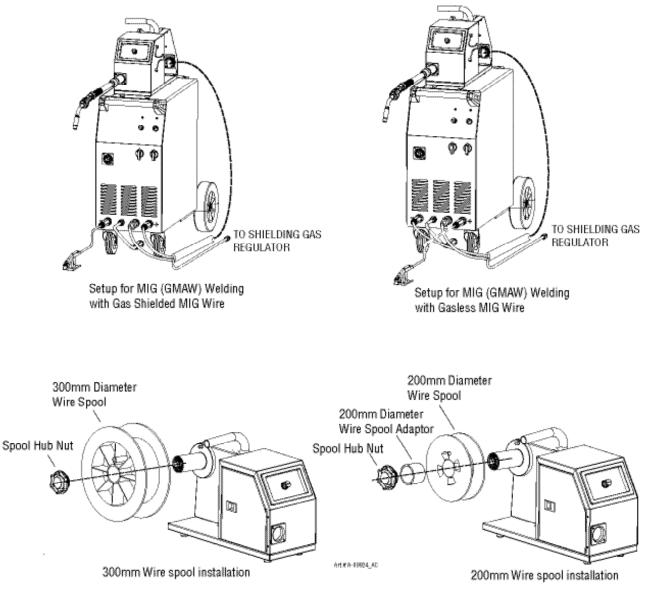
WeldSkill 250 & 350 WF Setup and WF Spool Hub
